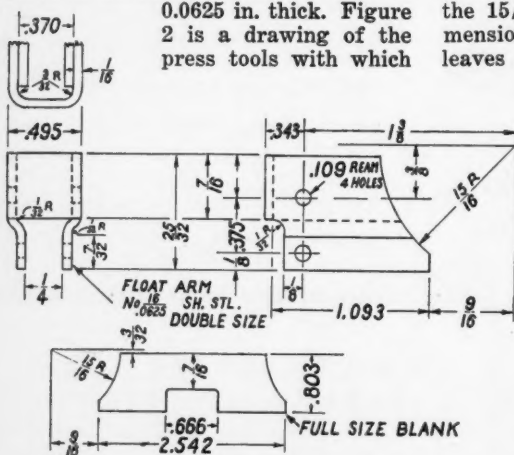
Drawing of sheet metal float arm for electric refrigerator.
